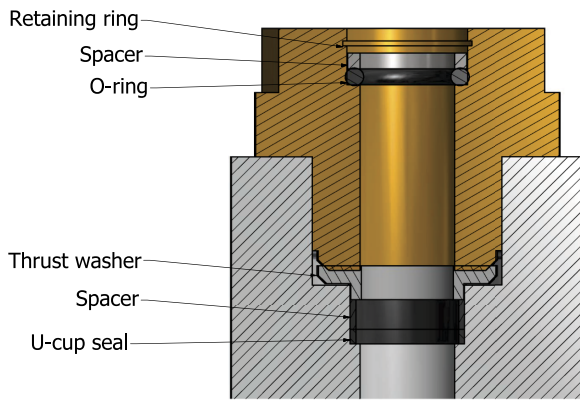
Schematics of top seal. As the brass seal nut is tightened, the thrust washer and spacer compress the U-cup seal. This causes the U-cup seal to expand around the pull rod, providing a tight seal.
